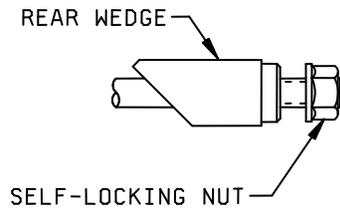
Screw retaining self-locking nut (corrosion resistant) details.
